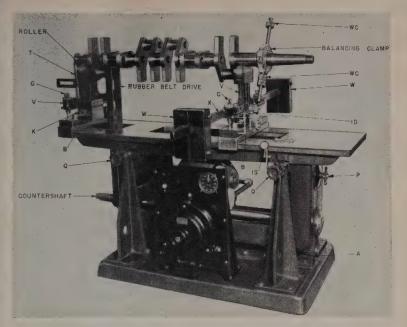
The Akimoff No. 2-H Balancing Machine.
